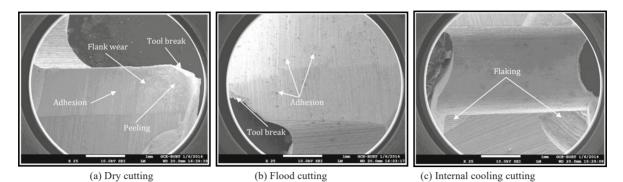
SEM views of milling tools wear under different cooling conditions (Workpiece material: EN 24 steel; Cutting parameters: cutting velocity: 22 m/min, table feed: 34 mm/min, depth of cut: 0.60 mm)⁹⁹.
